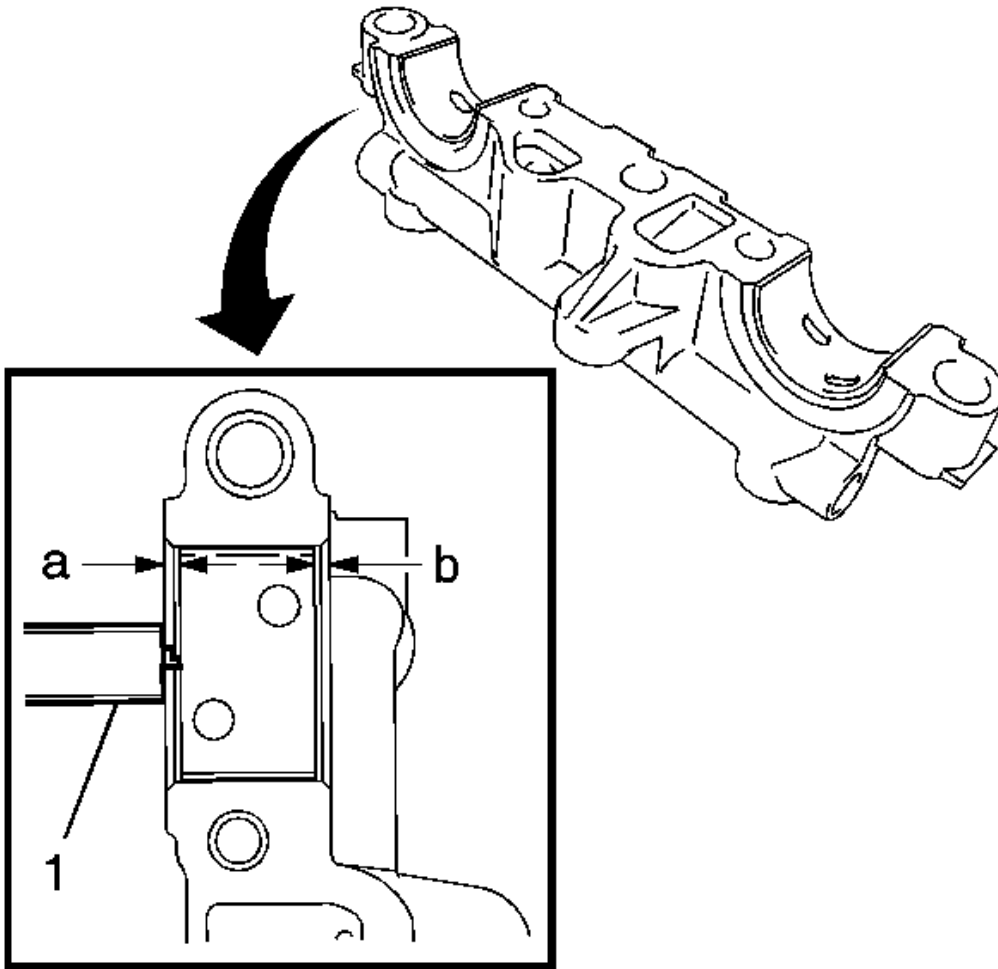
Measuring Distance Between Bearing Cap Edge & Camshaft Bearing Edge
